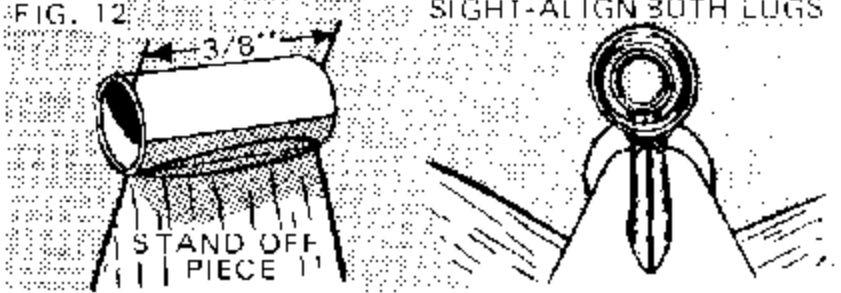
Cut two 3/8" long pieces of launch lug. Glue one piece to each stand-off. Check alignment by sighting through the two pieces.
